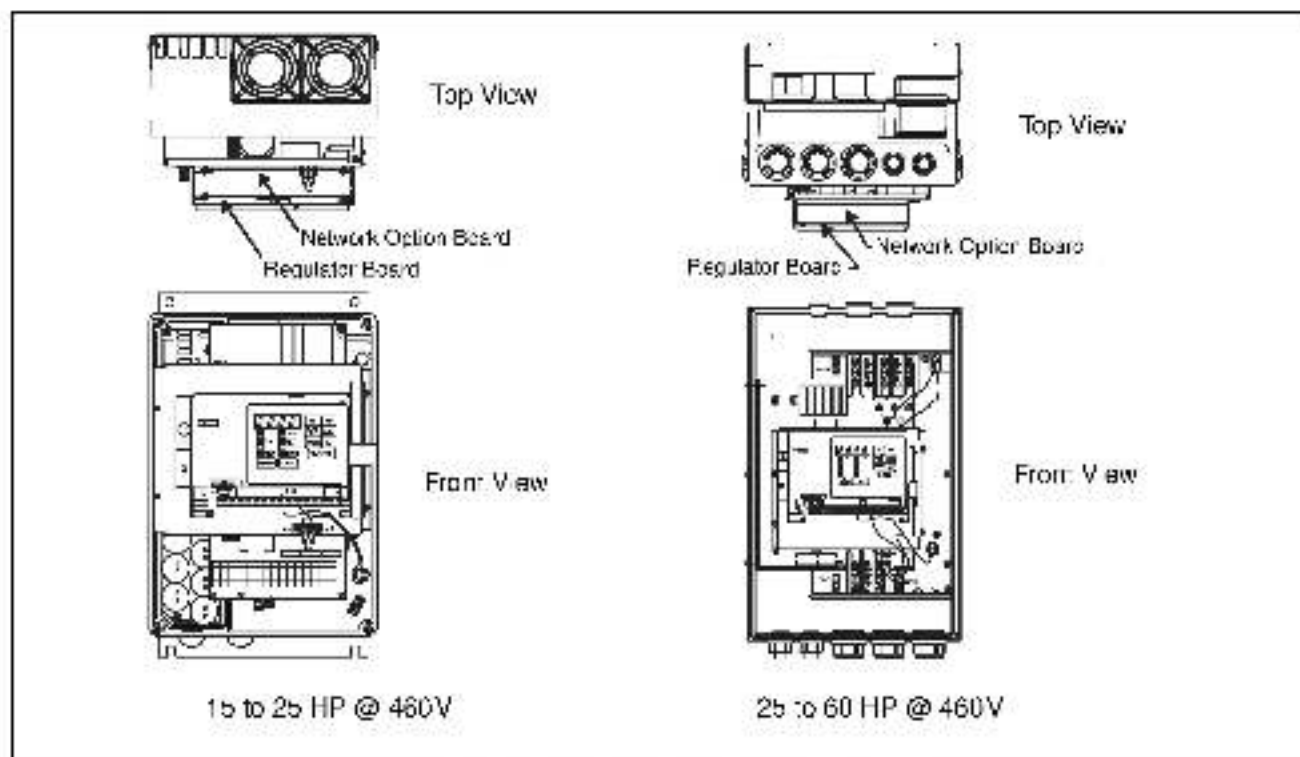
15 to 25 and 25 to 60 HP @ 460V GV3000/SE Drive
